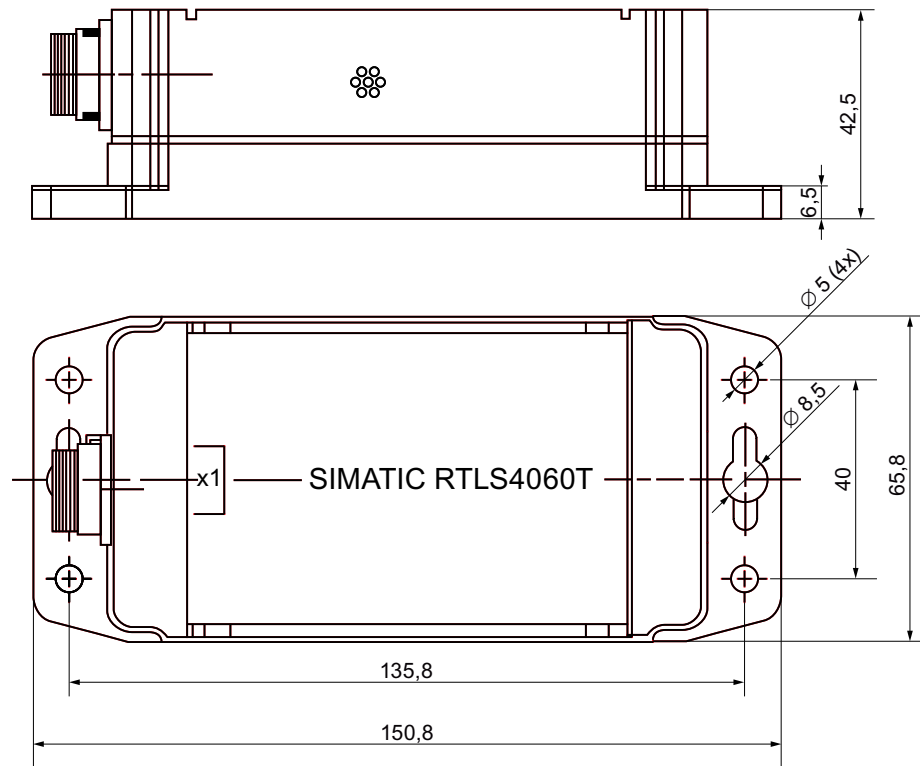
Dimension drawing SIMATIC RTLS4060T - All dimensions specified in millimeters
